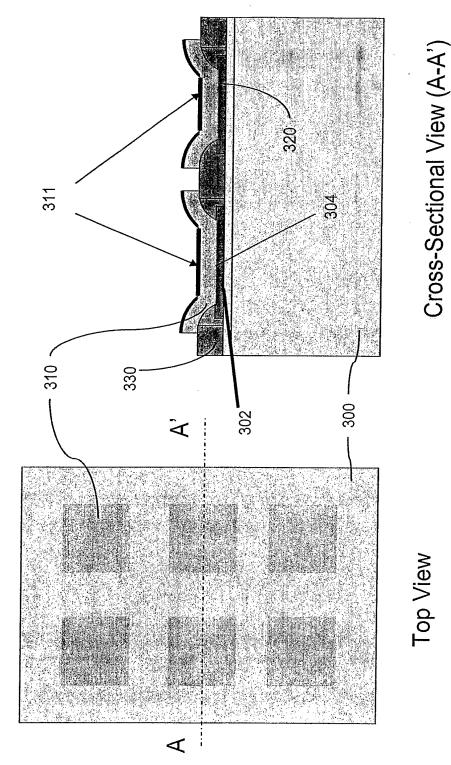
Die with Solderable Metal Contacts for Direct Printed Circuit Board Mounting
